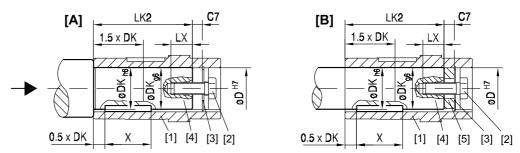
Customer shaft with contact shoulder (A) and without contact shoulder (B)
